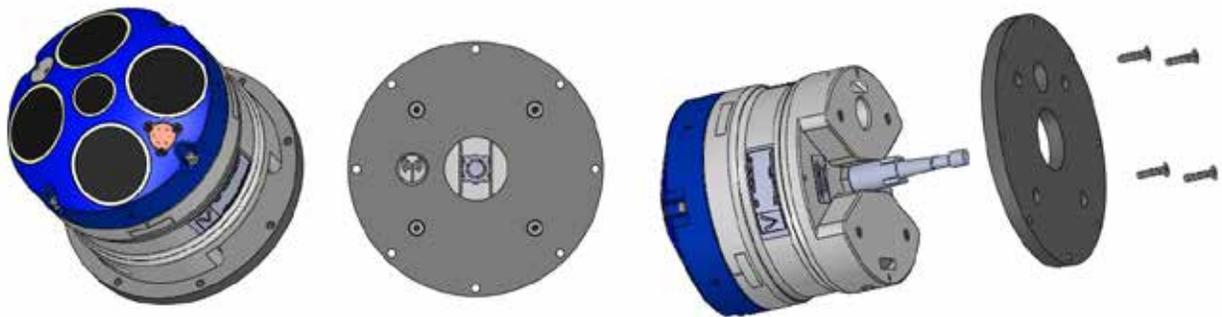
81D-5001 End-Cap Mounting Plate Adapter Kit
